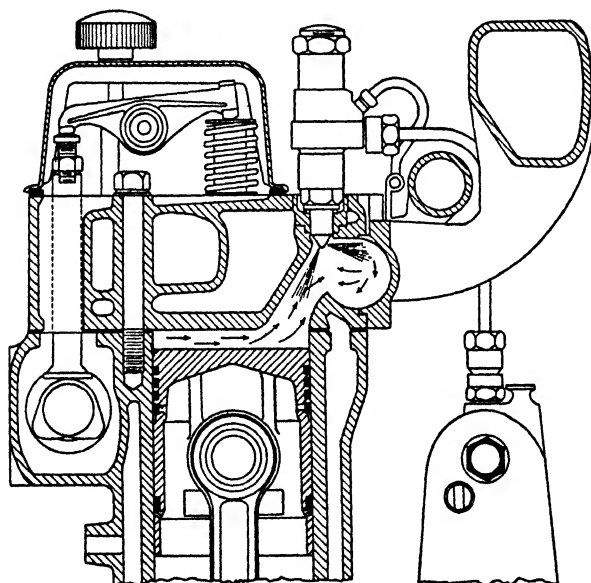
CYLINDER AND CYLINDER HEAD OF PERKINS ENGINE.
